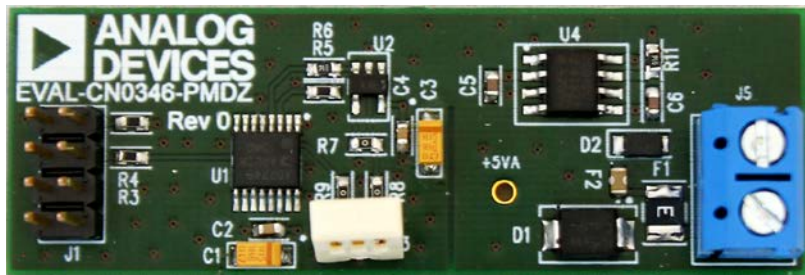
Photo of the EVAL-CN0346-PMDZ PCB
